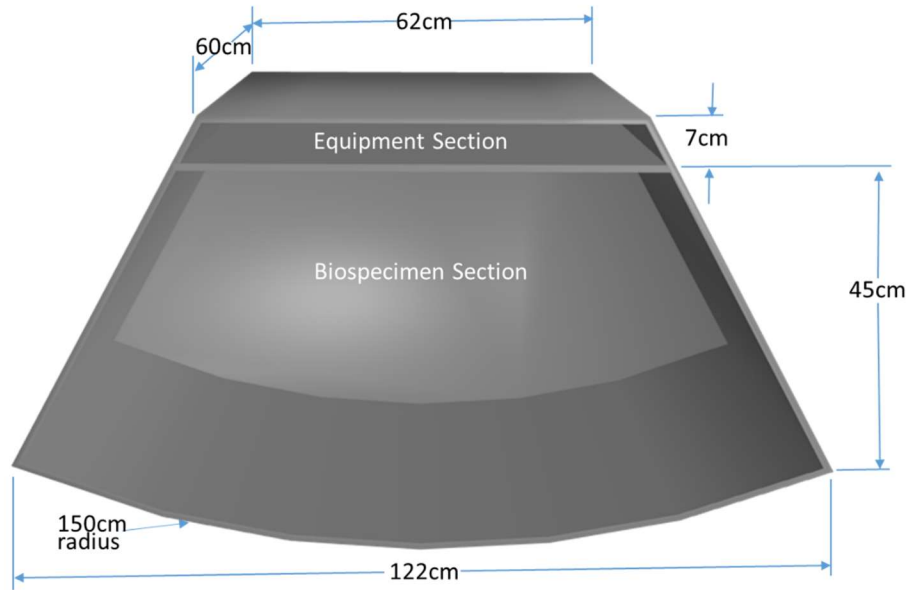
OMAGS Centrifuge Wheel CES Rim Module Layout Top Cutaway-View
